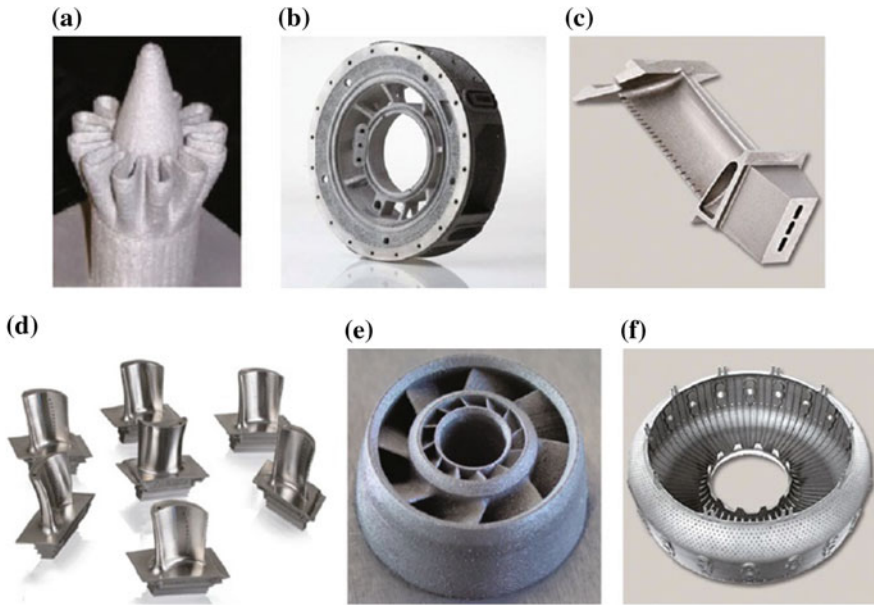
Examples of 3D printed components for aerospace industry: a Mixing nozzle for gas turbine exhaust; b compressor support case for gas turbine engine produced by EBM; c turbine blade with internal cooling channels produced by SLM; d turbine blades fabricated by SLM; e hollow static turbine blade cast using the mold and cores fabricated by 3DP; f engine housing produced by SLM. *Image Source* Guo and Leu (2013)
